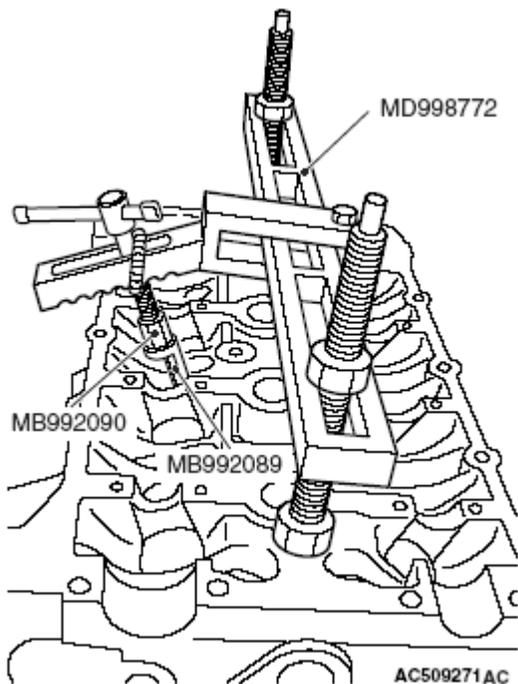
Identifying Special Tool MD998772, Special Tool MB992090 And Special Tool MB992089
